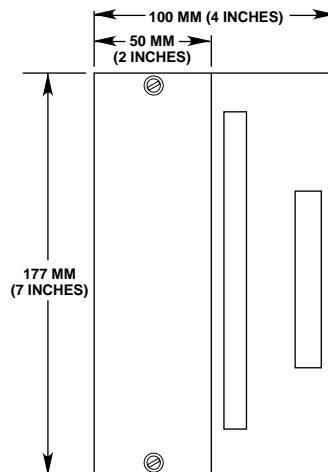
Relay Output Assembly Dimensions in Millimeters (Inches)
